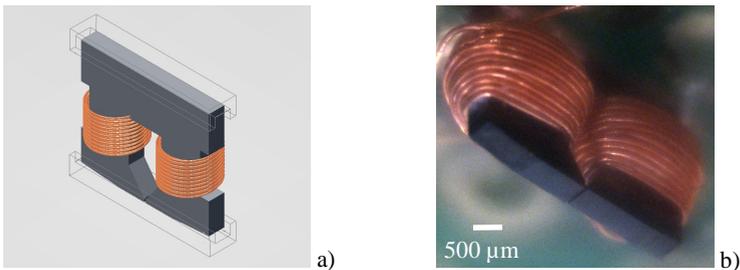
a) Glass sliders on the top and on the bottom (schematic), b) completed head
